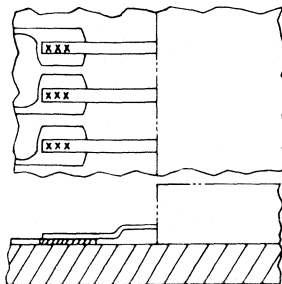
Surface-pad welding method for RCA flat packs.
